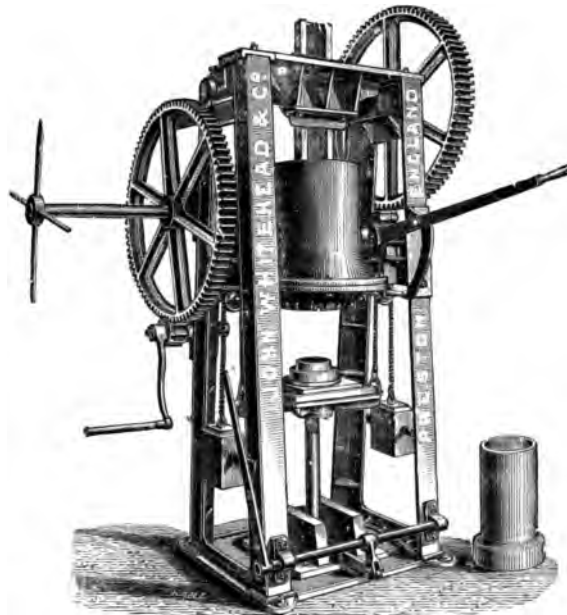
Vertical Expression Machine, worked by Hand (Whitehead).
